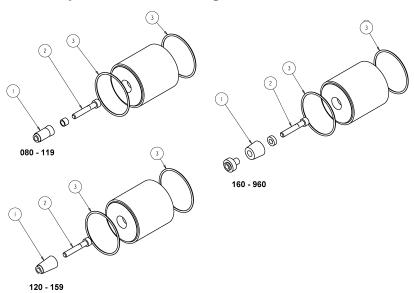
PR70 Nylon and UHMWPE Piston Replacement Kits
